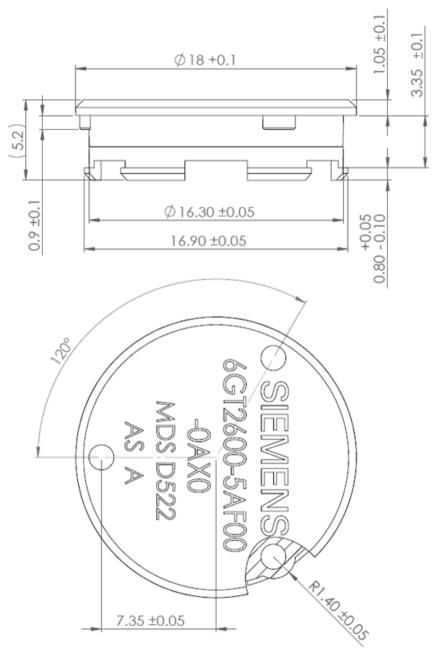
Dimension drawing MDS D522 special version All dimensions in mm
